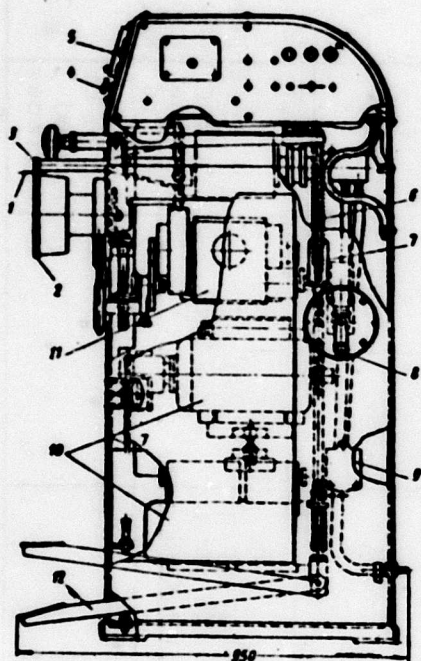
Diagram of unit UZSM-2: 1 - weldable components; 2 - lower roller; 3 - upper roller; 4 - potentiometer; 5 - control panel; 6 - spring; 7 - scale; 8 - handle; 9 - final switch; 10 - drive; 11 - reducer; 12 - pedal.
